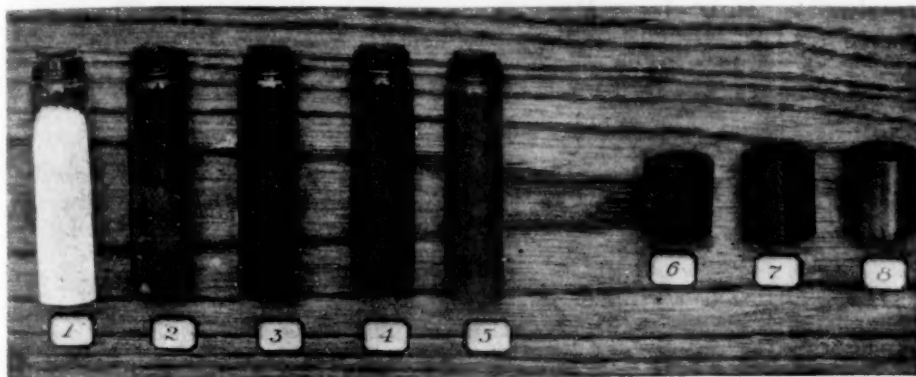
SOME OF THE STAGES IN MANUFACTURING GENELITE. Nos. 1, 2 and 3, Raw Materials; 4, Graphite; 5, Mixture Ready for Pressing; 6, Bushing, Pressed from the Powder; 7, Bushing after the Final Bake; 8, Finished Piece.
